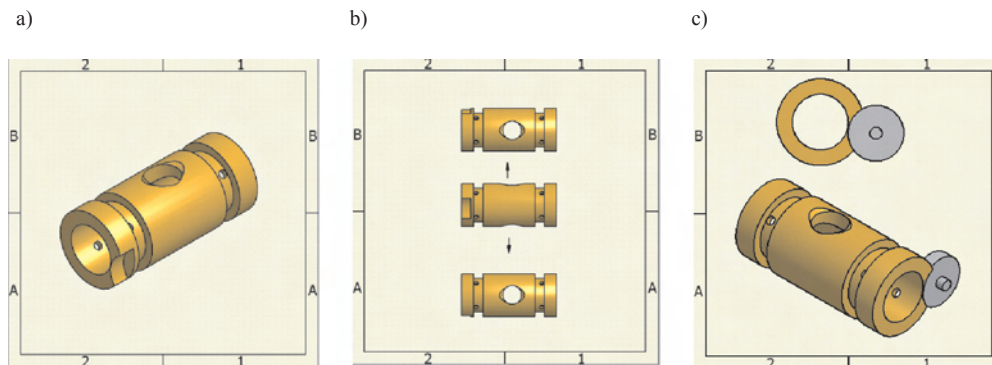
The bush of the transverse slide bearing: a) general view, b) upper and lower oil hole, c) orientation of the bush against the shroud
